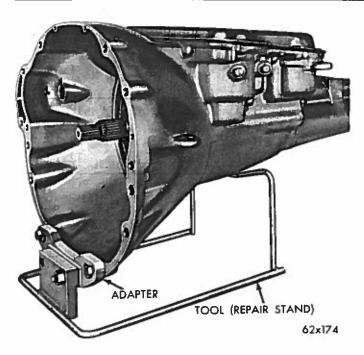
Transmission Installed in Repair Stand (Tool C-3750, Adapter C-3882)
